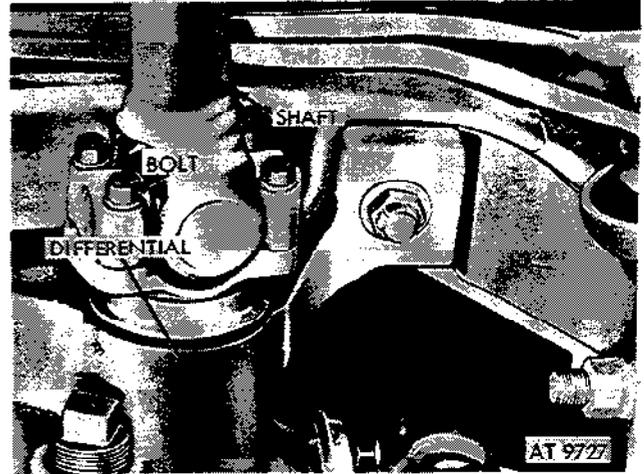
Remove universal joint bolts from differential end of propeller shaft.
